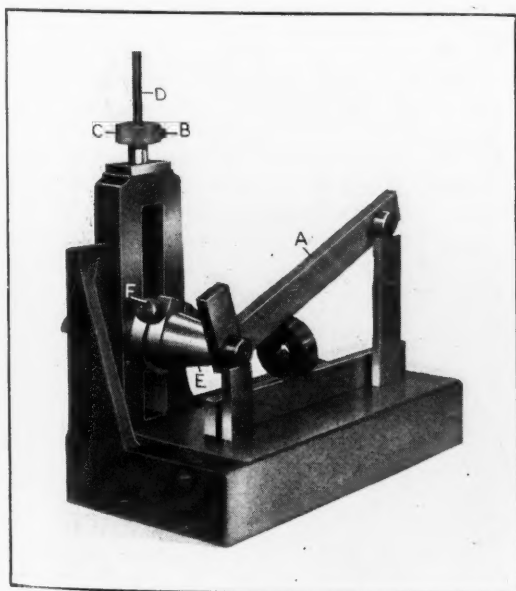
Sine Bar Fixture in which the Sine Bar can be adjusted vertically without disturbing the Angular Setting
